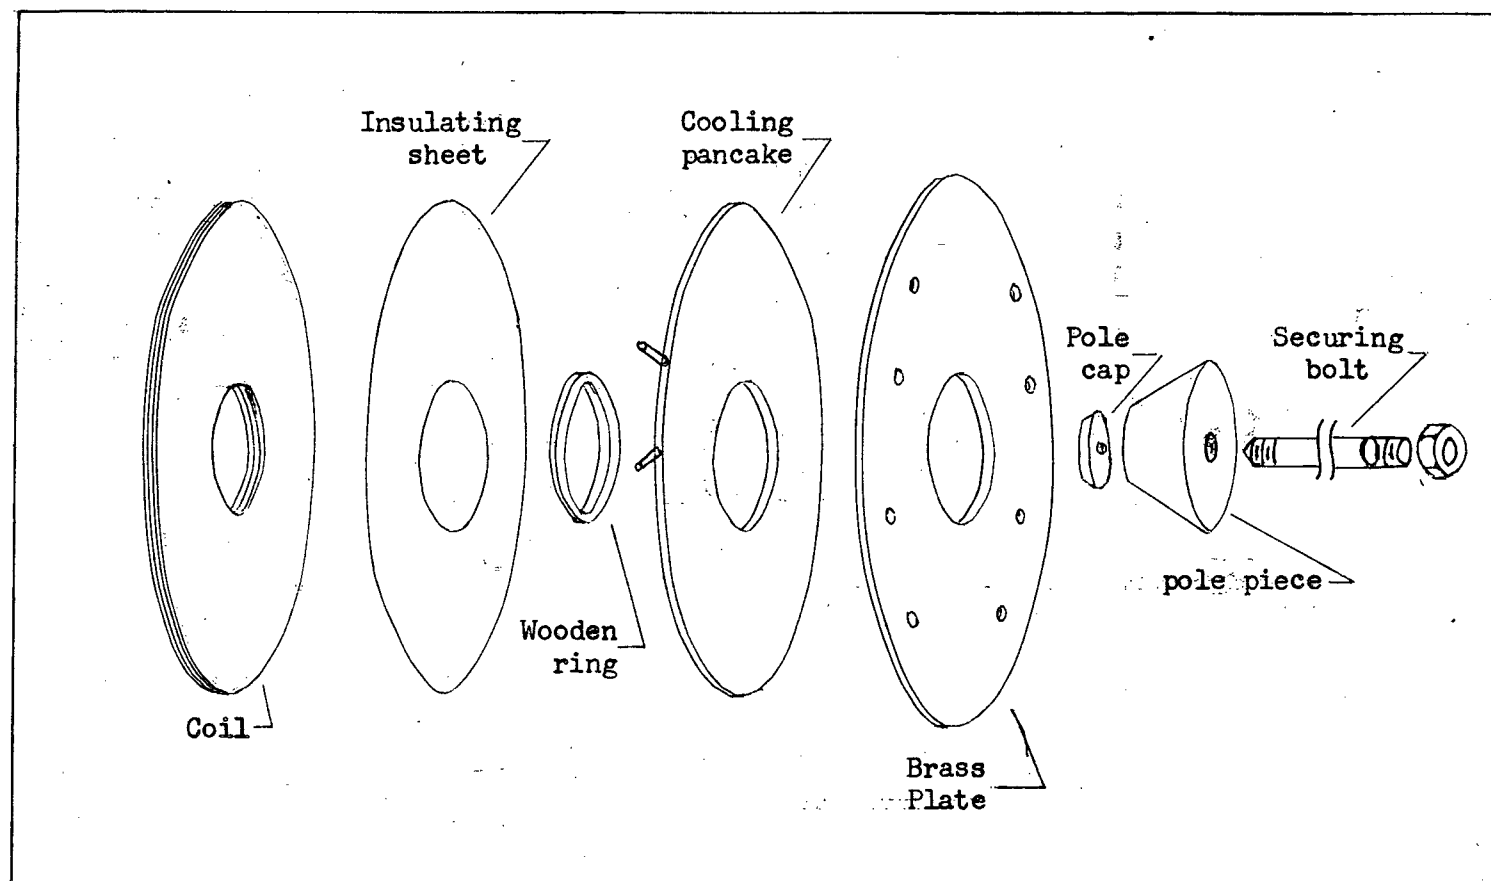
Component parts of one coil assembly are shown. See page 15 for full description of the coil assemblies.
